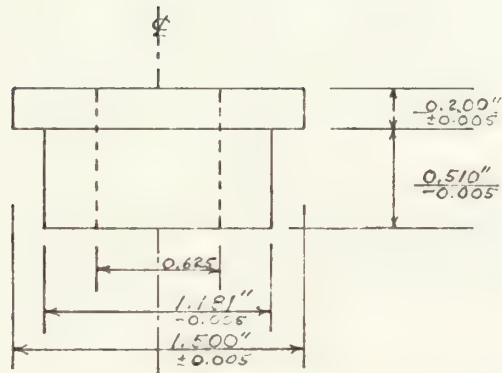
PIECE III-3-4, BEARING RETAINER
